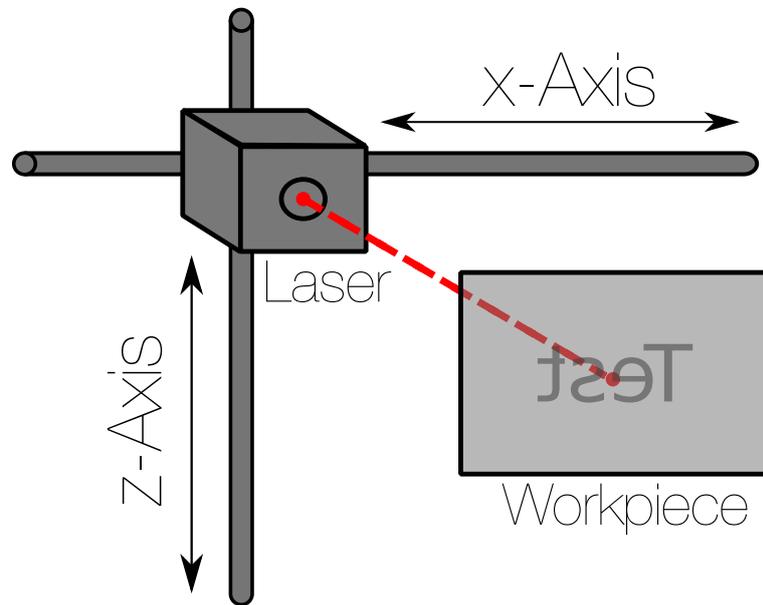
Sketch of a fixed workpiece (front) and a laser module attached to a 2-axis linear motion system (back).
